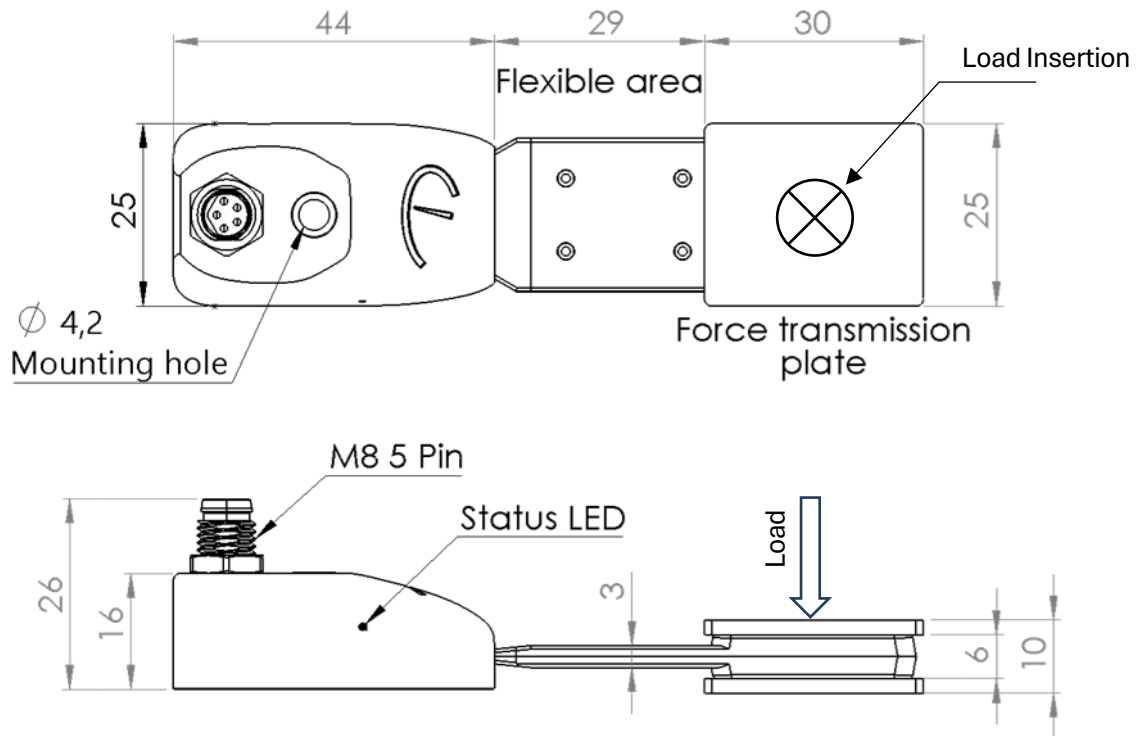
Drawing of Sensor 5M8V - M8 Male plug in housing
